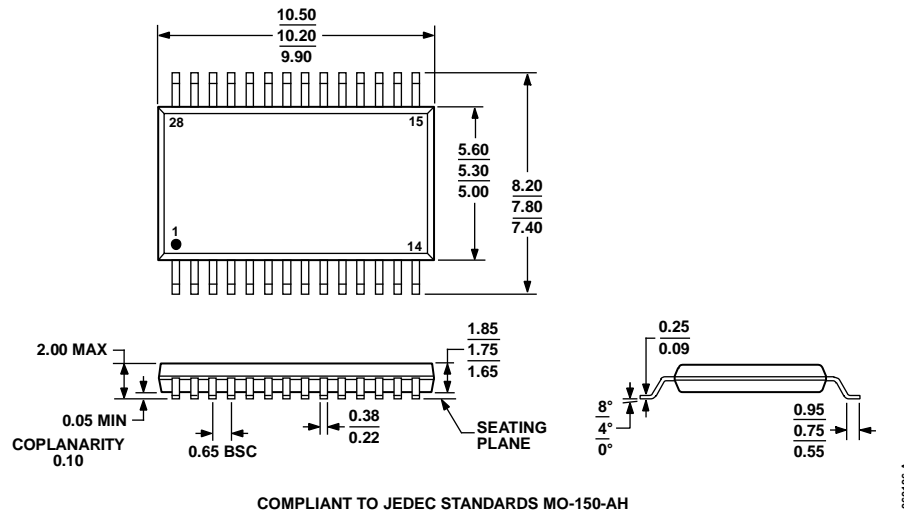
28-Lead Shrink Small Outline Package [SSOP] (RS-28)
